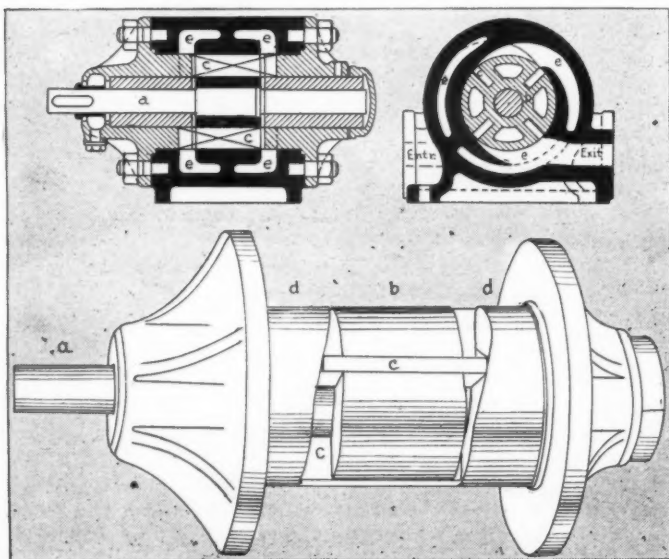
Sectional views of rotary pump for fire engines as designed by V. Pittler—with side view detail of the rotary piston and adjacent parts
